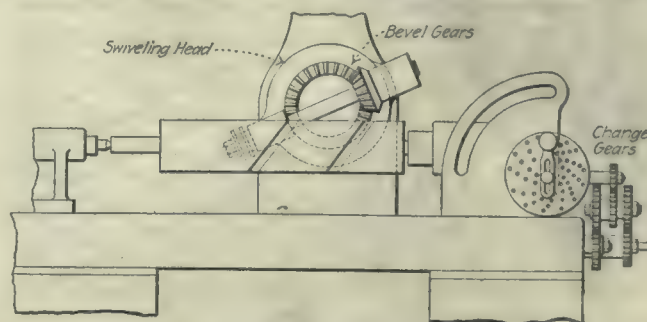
MILLING MACHINE ARRANGED FOR GROOVING
